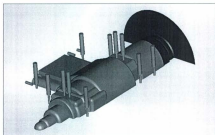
Rendering of inner pod clearance volume, complete with seal and adaptor trimming geometry as well as fastener holes.
